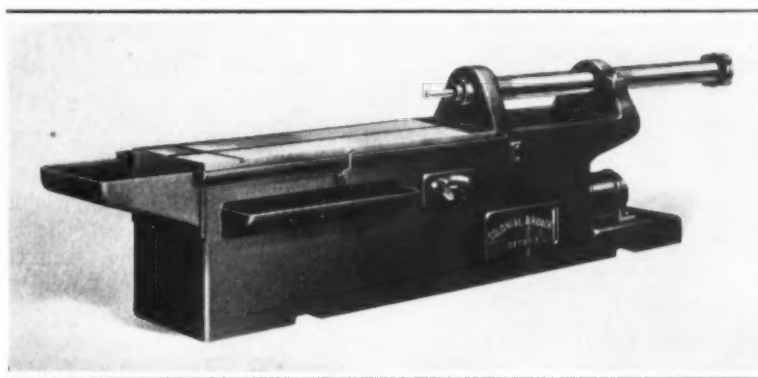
High-speed Machine Designed for Continuous Production of Small Parts; it May be Equipped with Magazine Feeds
